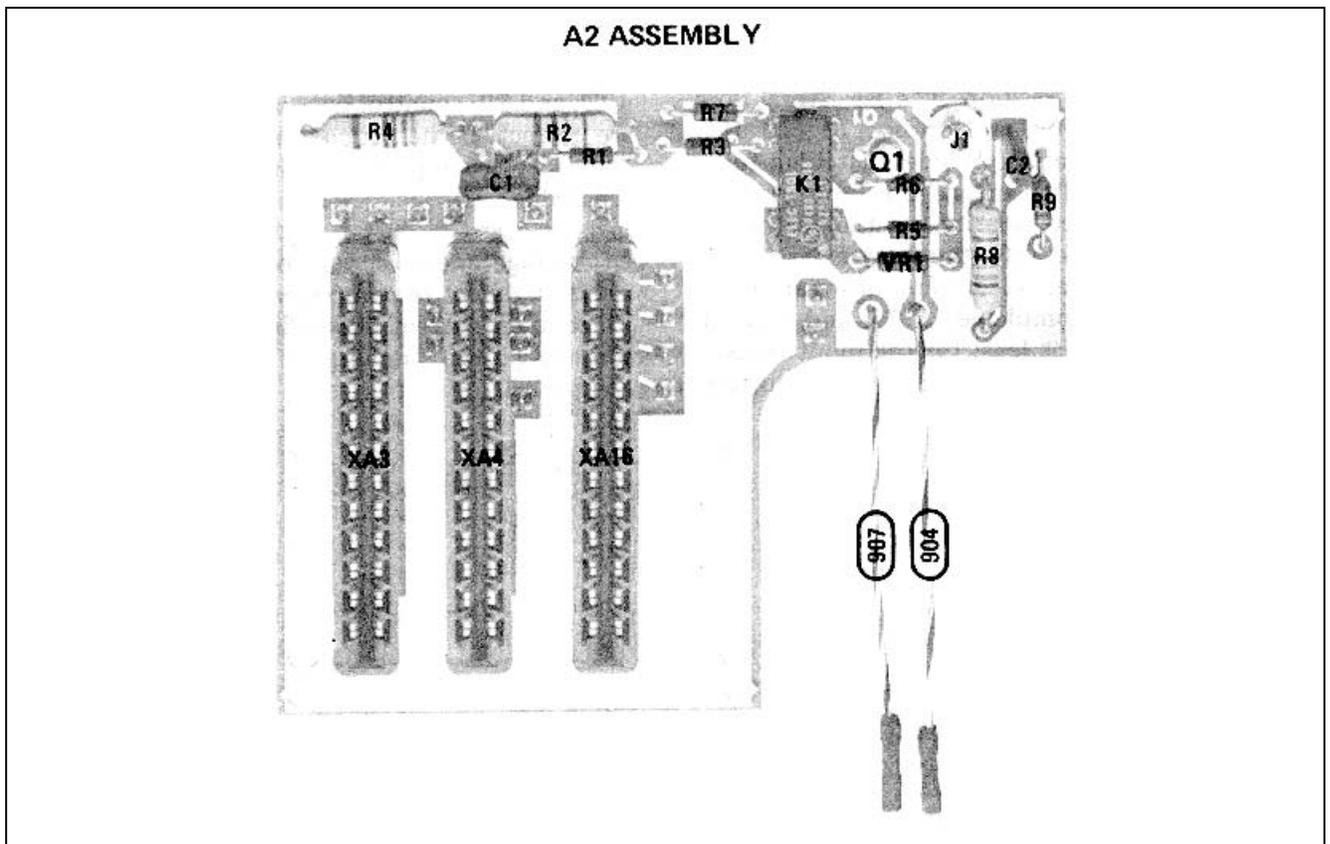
A2 ALC Mother Board Assembly Component Locations
